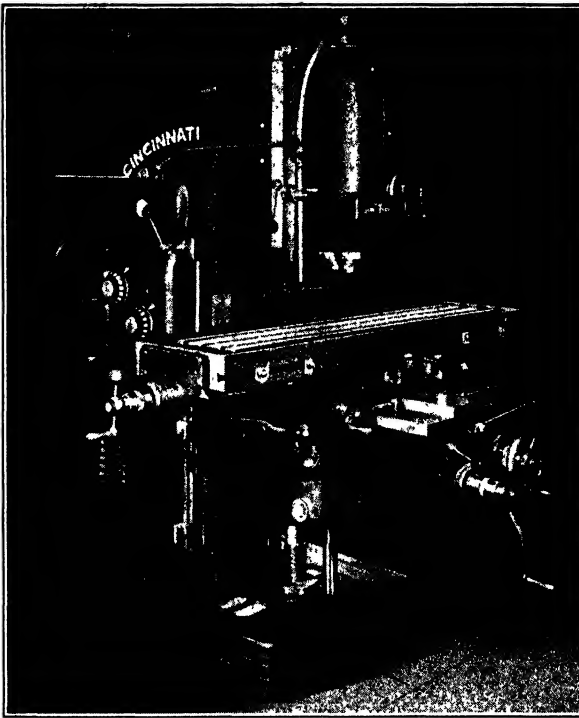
Vertical milling machine. (Courtesy Cincinnati Milling Machine Co.)
